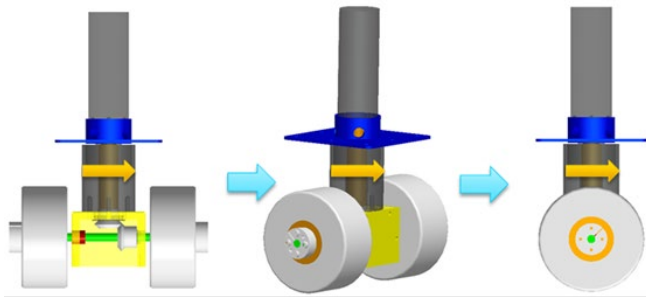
For the second-generation wheel module design, when the one-way bearing is disengaged, the wheel module turns.
